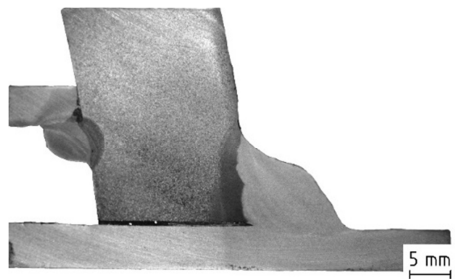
Macrograph of fillet weld joint between sphere-like part of the sleeve and pipe.
